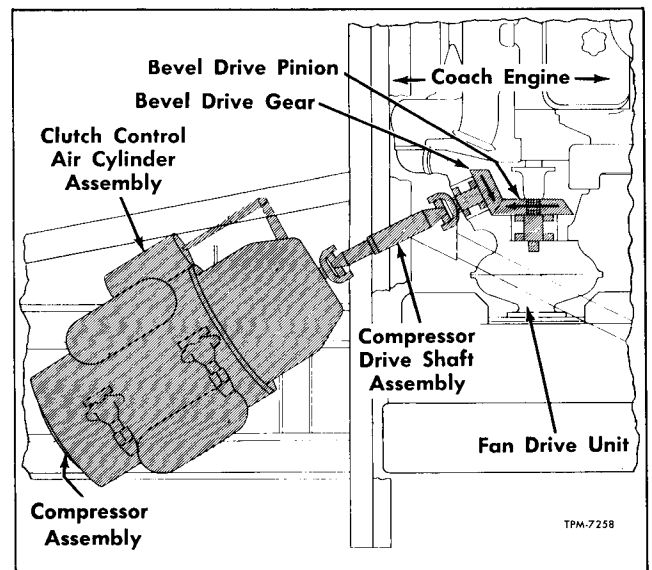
Compressor Drive Shaft and Accessory Drive Layout (Typical)
